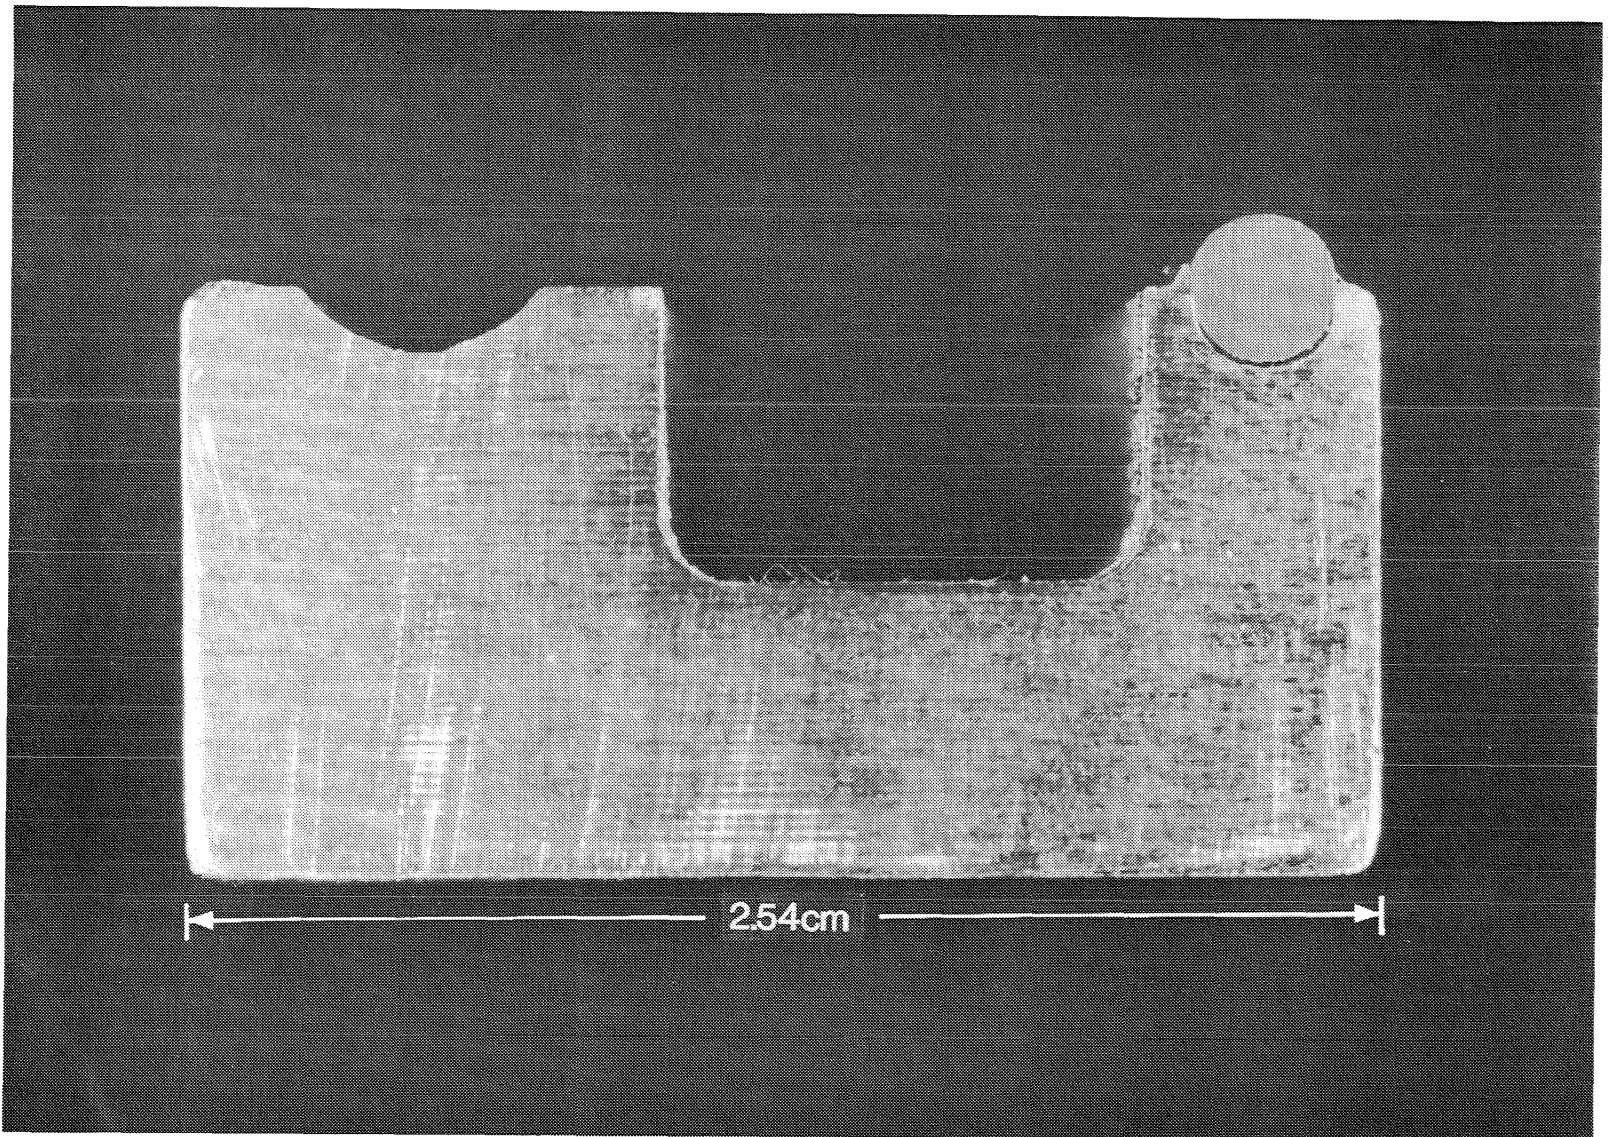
Close-up cross sectional view of the mounting brackets for the panels.
